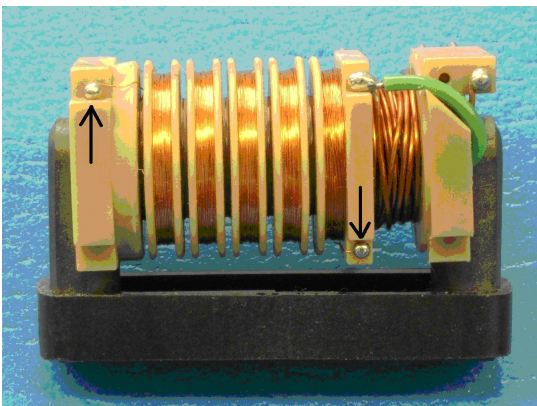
Solder joints containing lead for the soldering thin copper wires (<0.1mm) in two joints (arrows) on the secondary winding of a high voltage power transformer (source: Roband Electronics)
